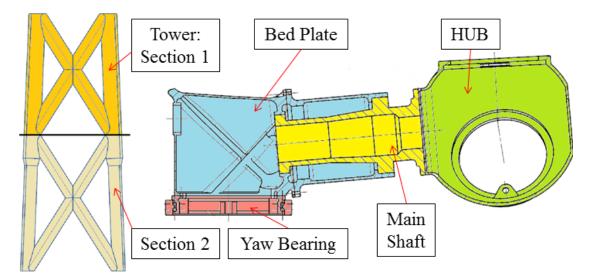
Top sections of tower and Yaw bearing, bed plate, main shaft, and hub
